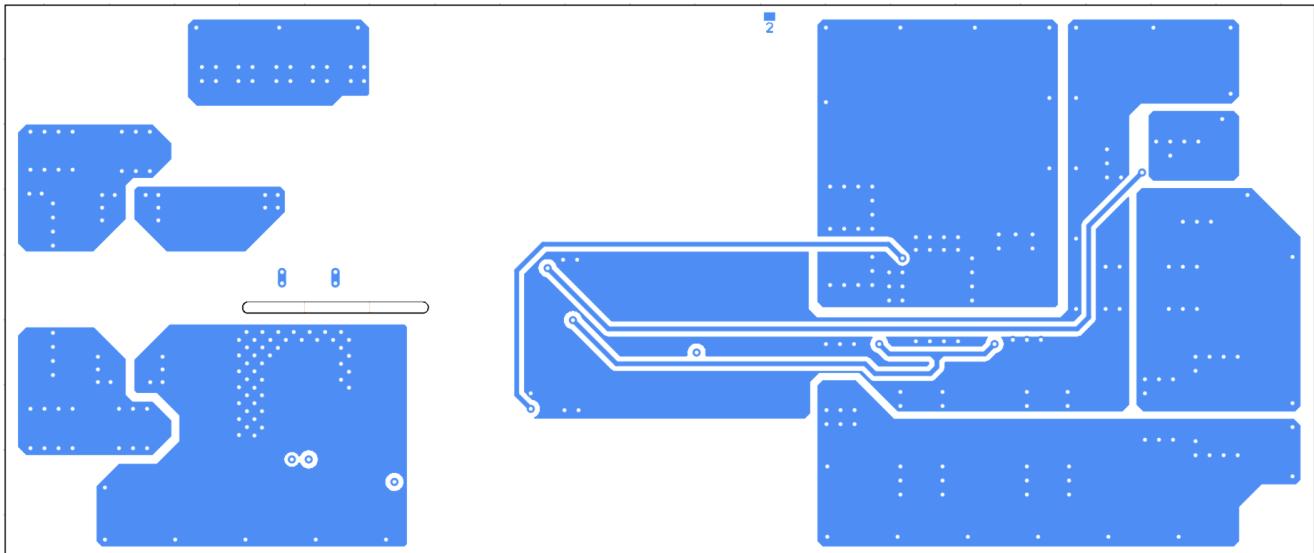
RDR-994Q Mid-Layer 2 PCB Layout.
